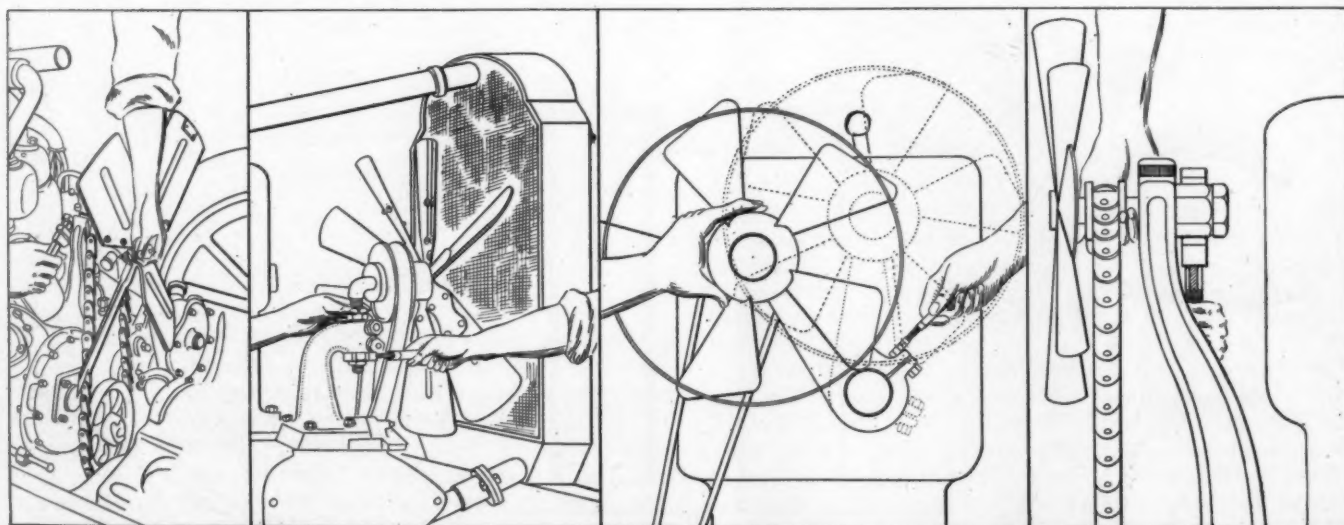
Methods of tightening fan belt; nut and groove, nut and lock nut, swinging adjustment and rear view of nut and grooved bracket
